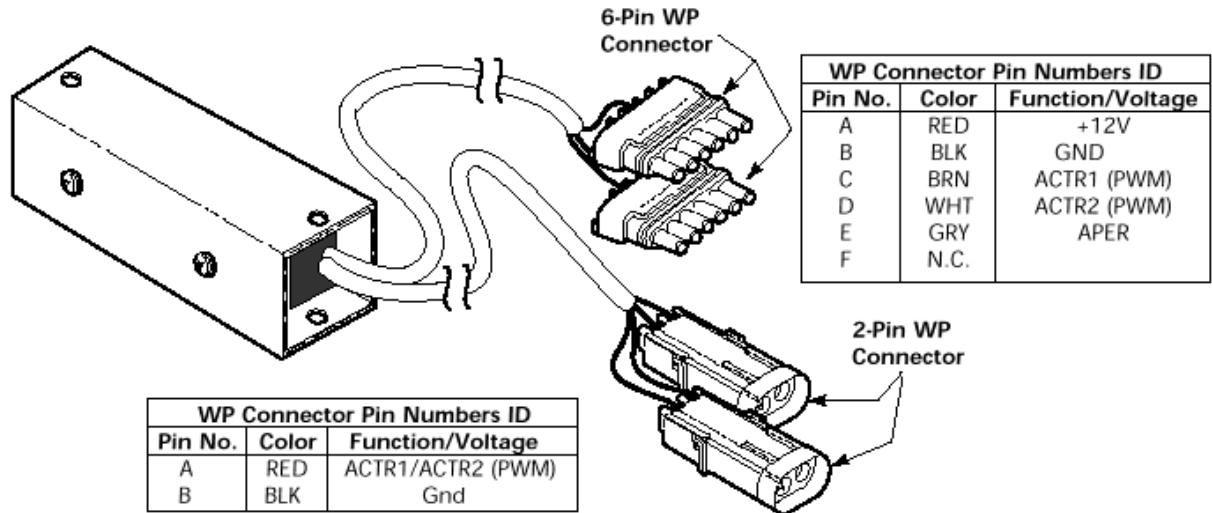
Hydraulic Valve Driver (46436-0030A)
